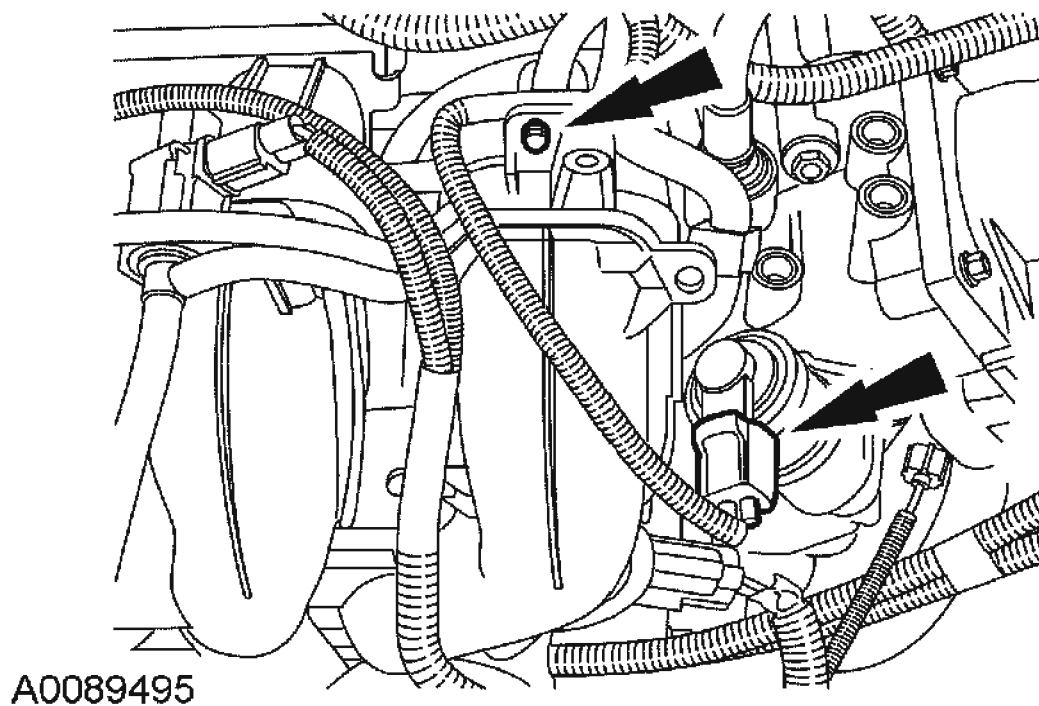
Connecting IAC Valve Electrical Connector And Wiring Harness Pin-Type Retainer
